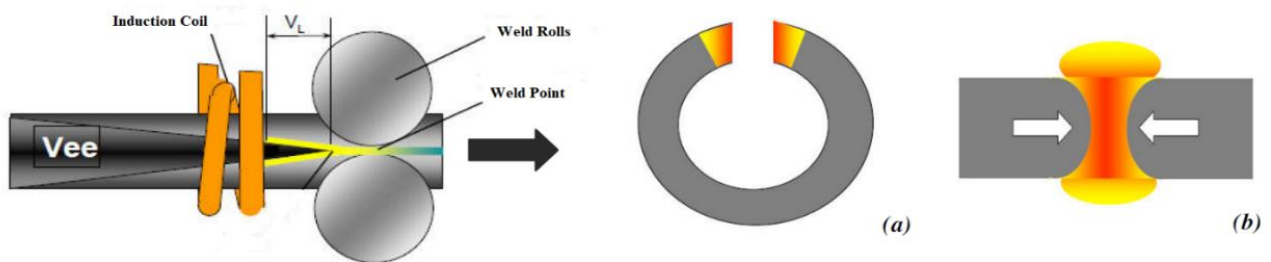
HF induction welding (a) heating of coil edges (b) forging during HFI welding for pipe production
